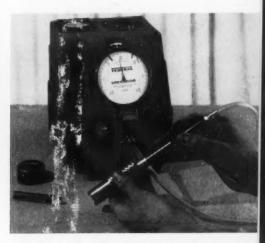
This illustration clearly shows the effect of measuring workpieces by means of an air gage extension tube.
